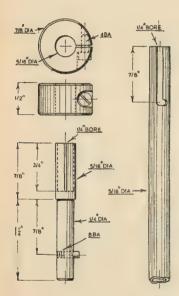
Showing the method of attaching the stirrer to the motor, spindle
